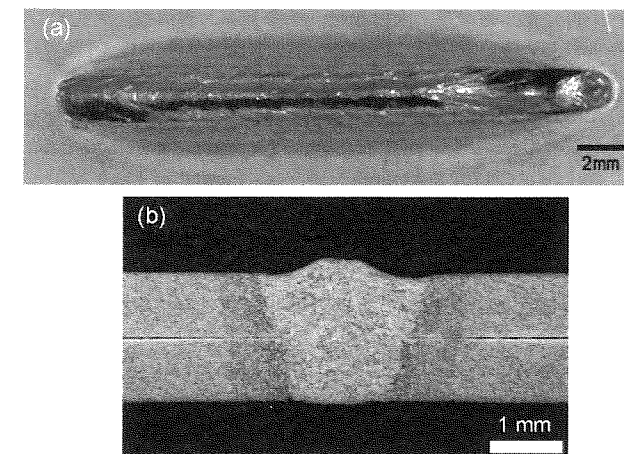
LC³W[®] results for 1 mm thickness electrogalvanized steel sheet at output power 3 kW and welding speed 1.5 m/min. (a) appearance of weld bead, (b) cross section.
